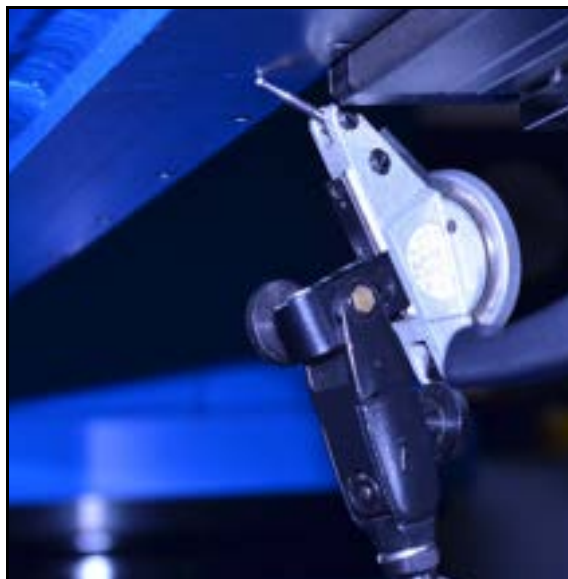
INDICATOR TOUCHING MACHINE RAM SURFACE
